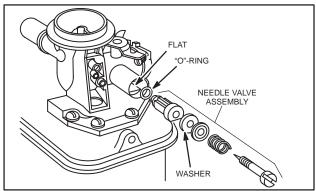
NEEDLE VALVE ASSEMBLY, PRESSED-IN-TYPE
